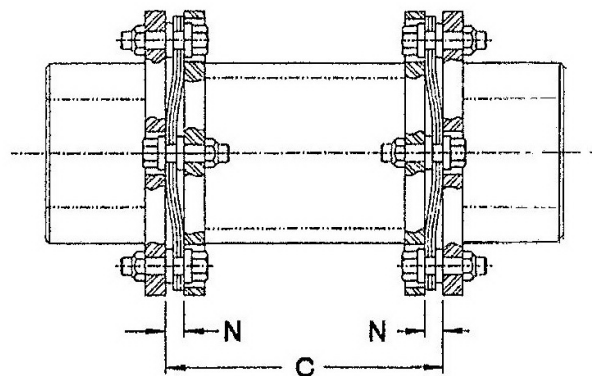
The disk pack is wavy and the dimension "N" between flange faces is smaller than indicated on the installation instructions or applicable assembly drawing.
